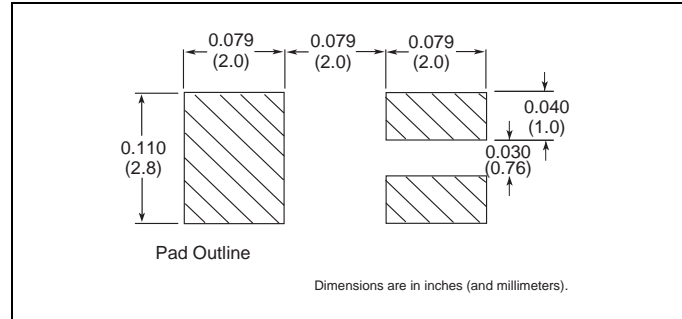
Modified DO-214 Compak — Three-leaded Surface Mount Package
